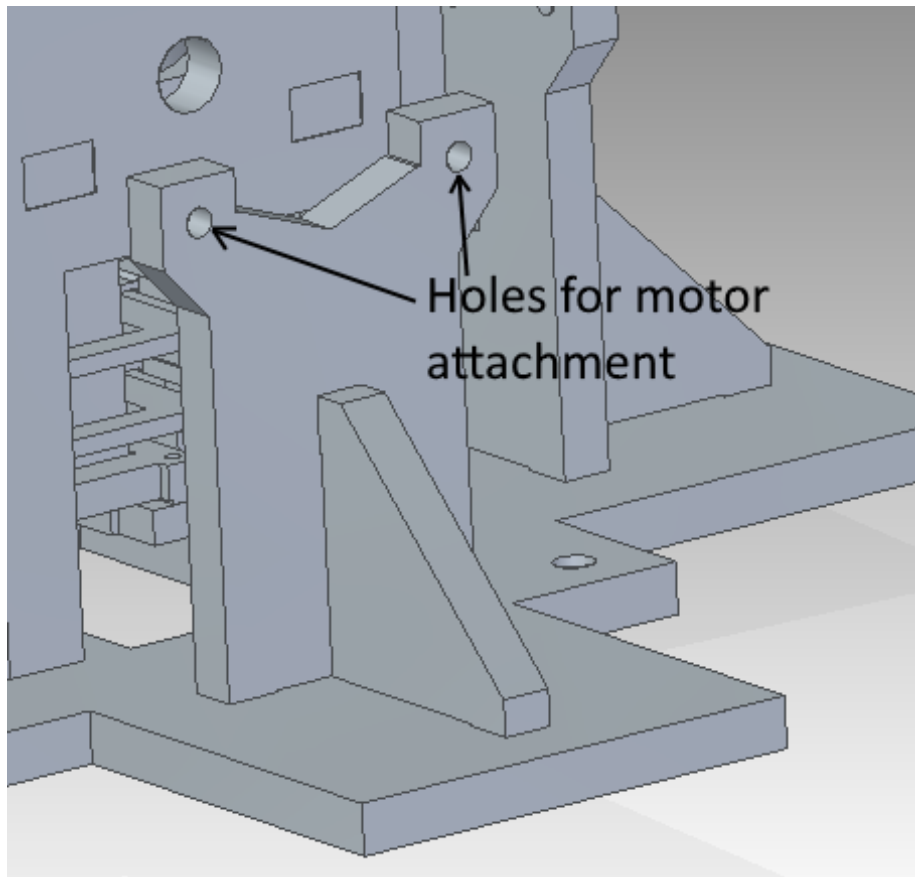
Design for motor holders in the final design. The rails for the motors are made by a normal screw and 2 bolts. A spring and the motor go between the screw-head and one bolt. And it is secured through the holes shown in the structure, fastened with the second bolt.
